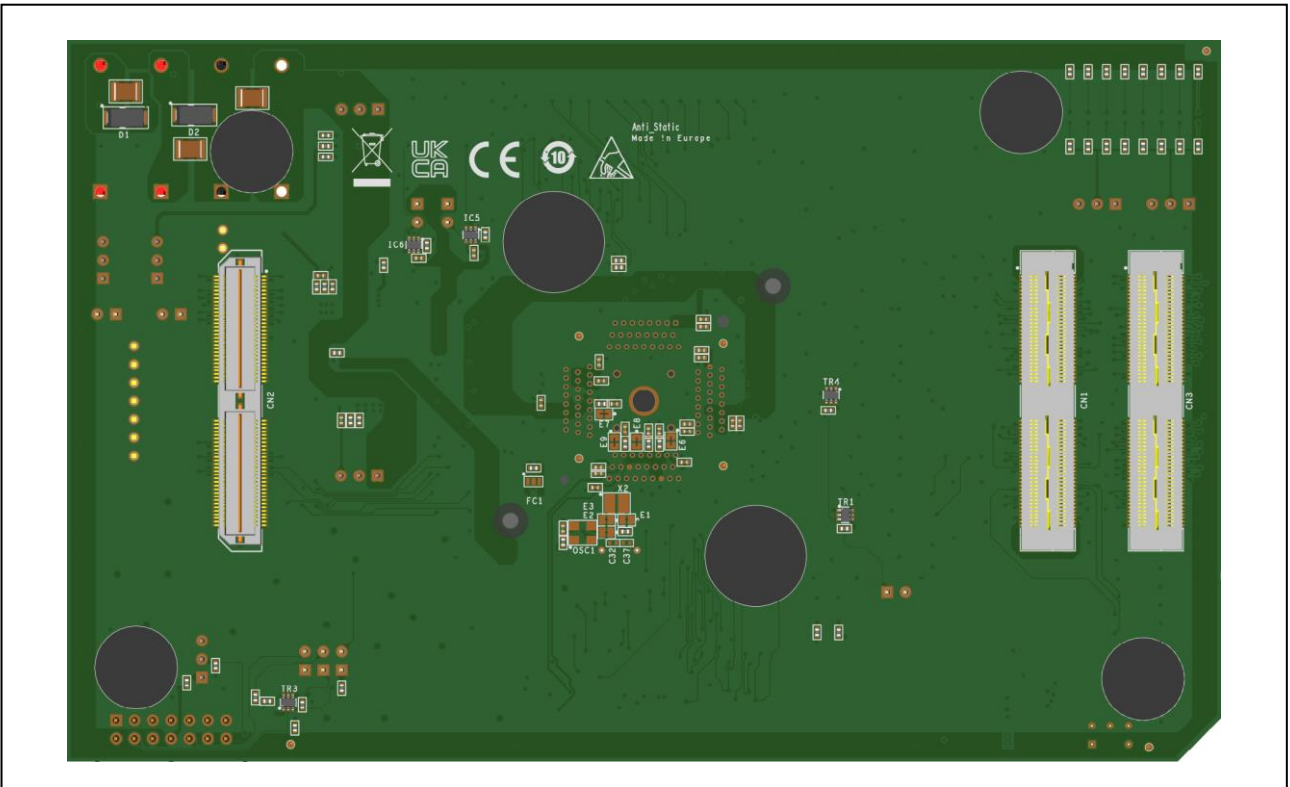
Piggyback board bottom view of board version D020647_06_V01
